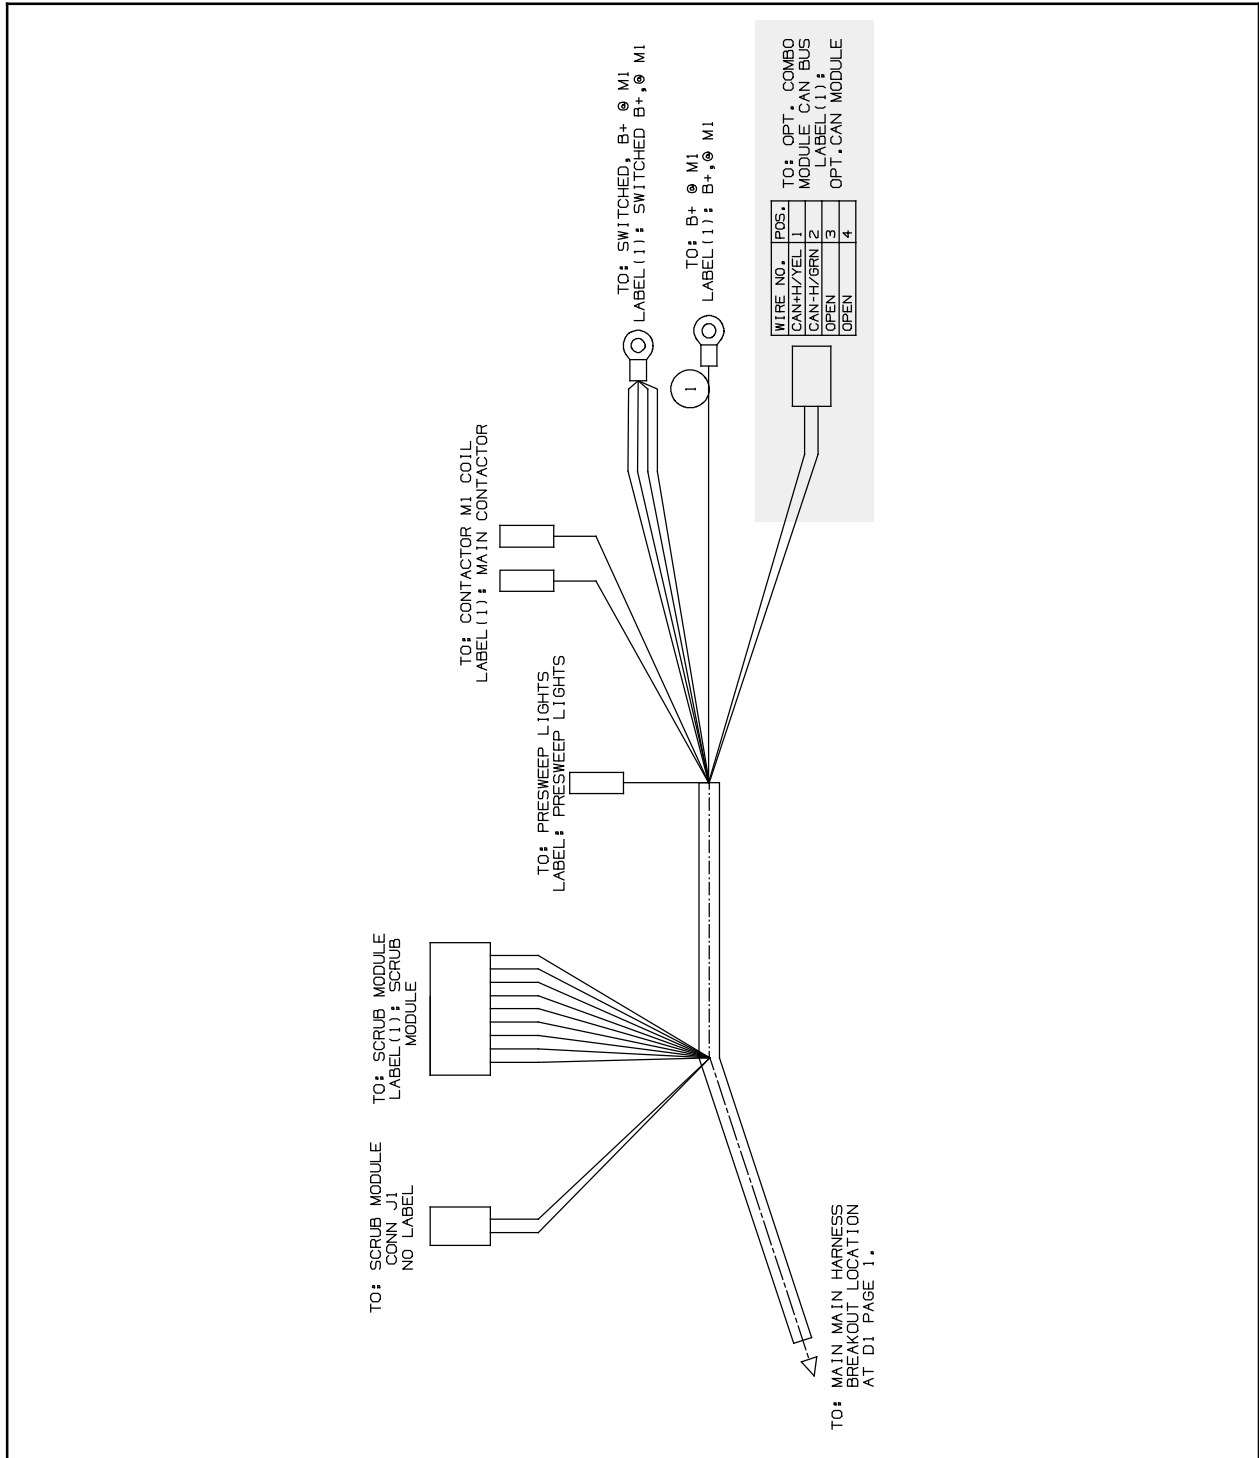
Machine Main Wire Harness CAN BUS Lead
